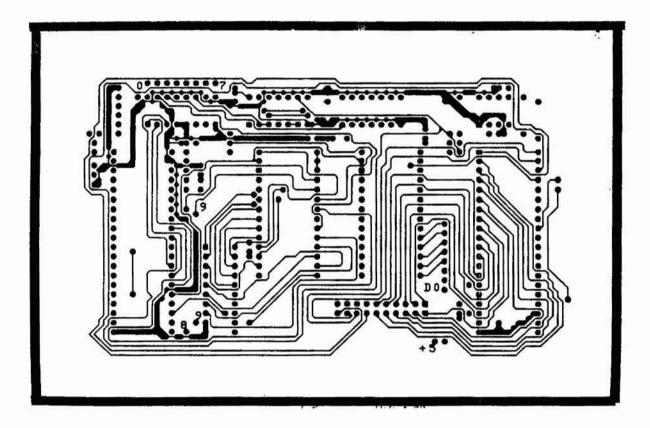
(b) Layout of PCB for Remote data acquisition and storage system (Component side)
